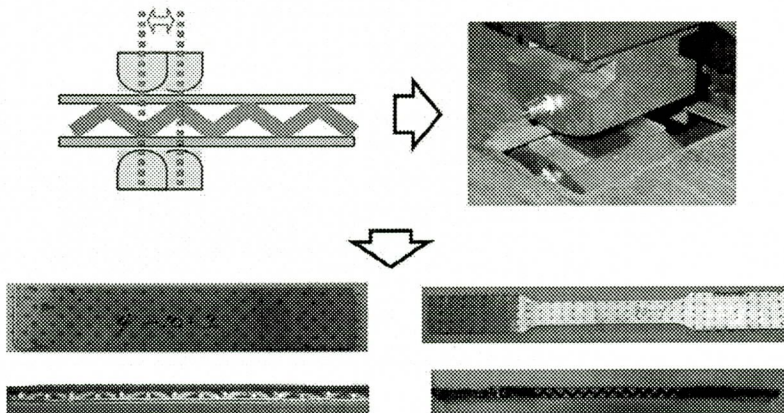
Multi points electrical resistance welding and shape of electrode
